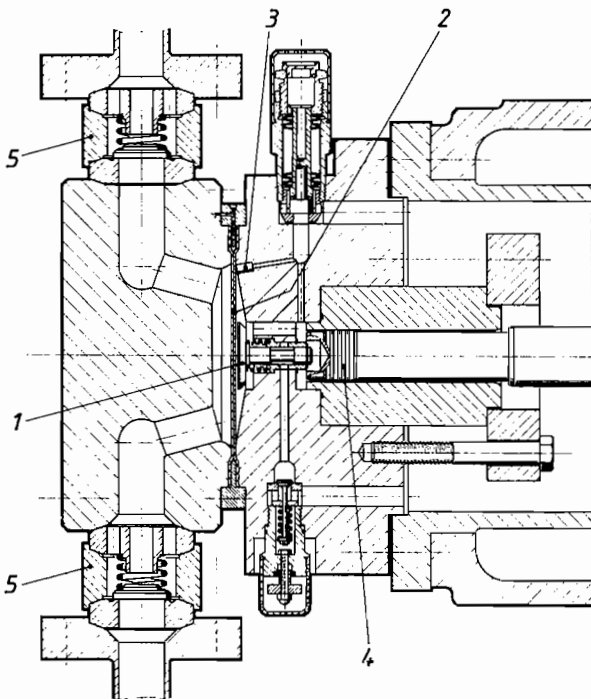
Diaphragm Head for a Large Triplex Process Pump (320 bar, see Figure 5) — 1) gate valve, 2) sandwich diaphragm, 3) venting bore, 4) piston ring seal, 5) pump valves (plate springloaded).
